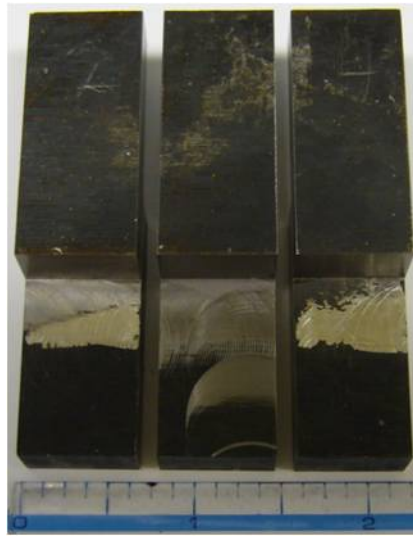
O1 tool steel/O1 tool steel USS lap shear specimen.
